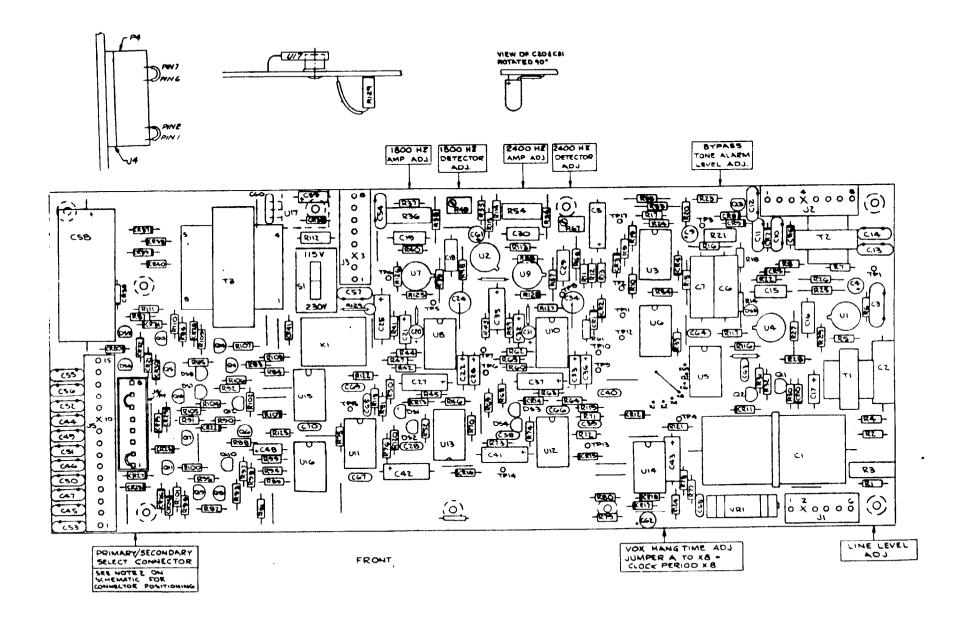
Remote Control PC Board Assembly Al, Component Locations
